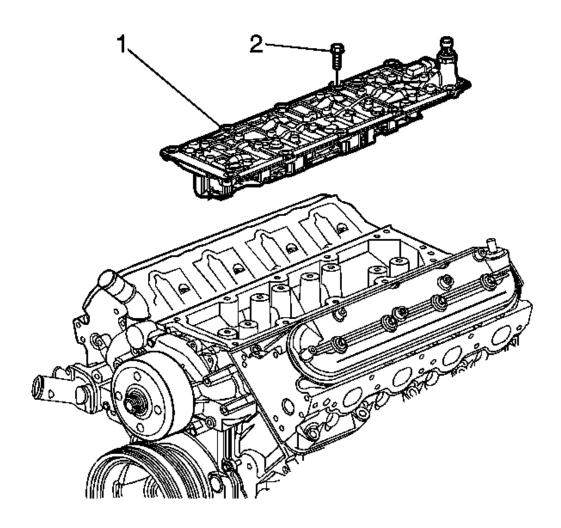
Valve Lifter Oil Manifold Courtesy of GENERAL MOTORS CORP.
